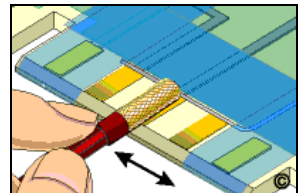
Swab all the contacts by brushing the surface with the saturated plating probe.
